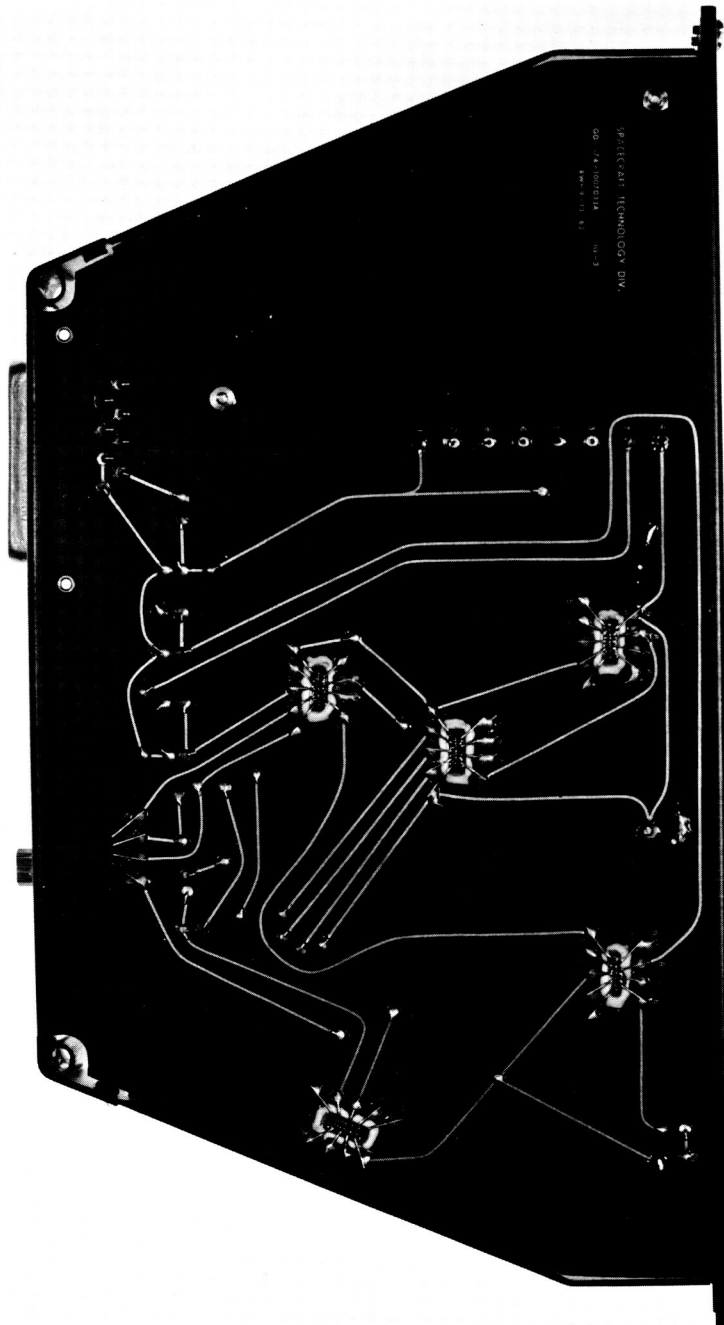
IG3, Card 3, Magnetometer Electronics (Bottom)
